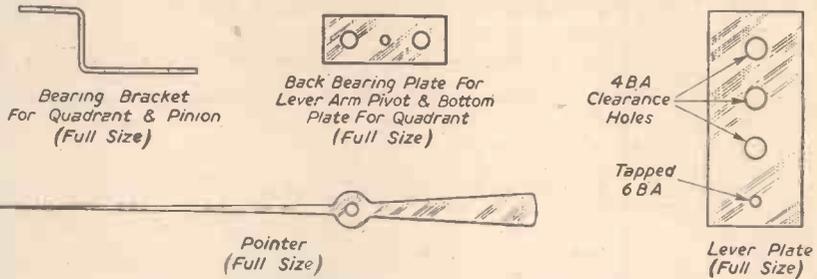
Details of bearing bracket, lever plate and pointer.
